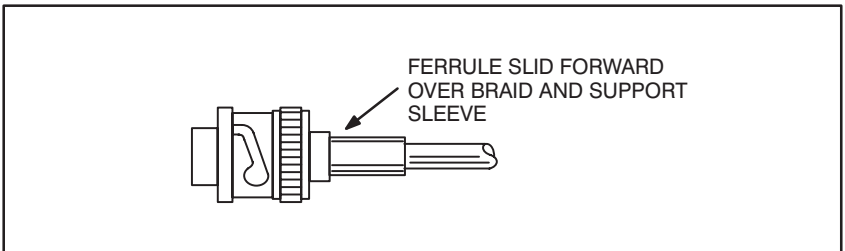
Connector Installation Step 8 for RG-59/U Cable
